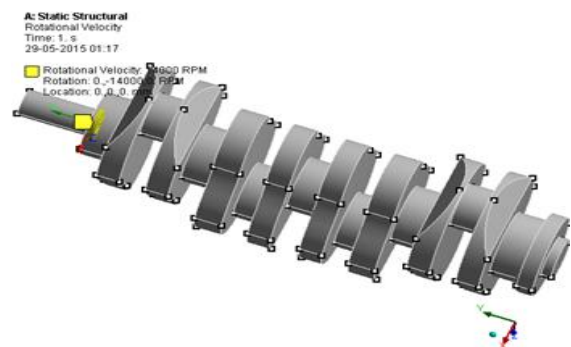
FEA Model of forged steel crankshaft showing rotational velocity
